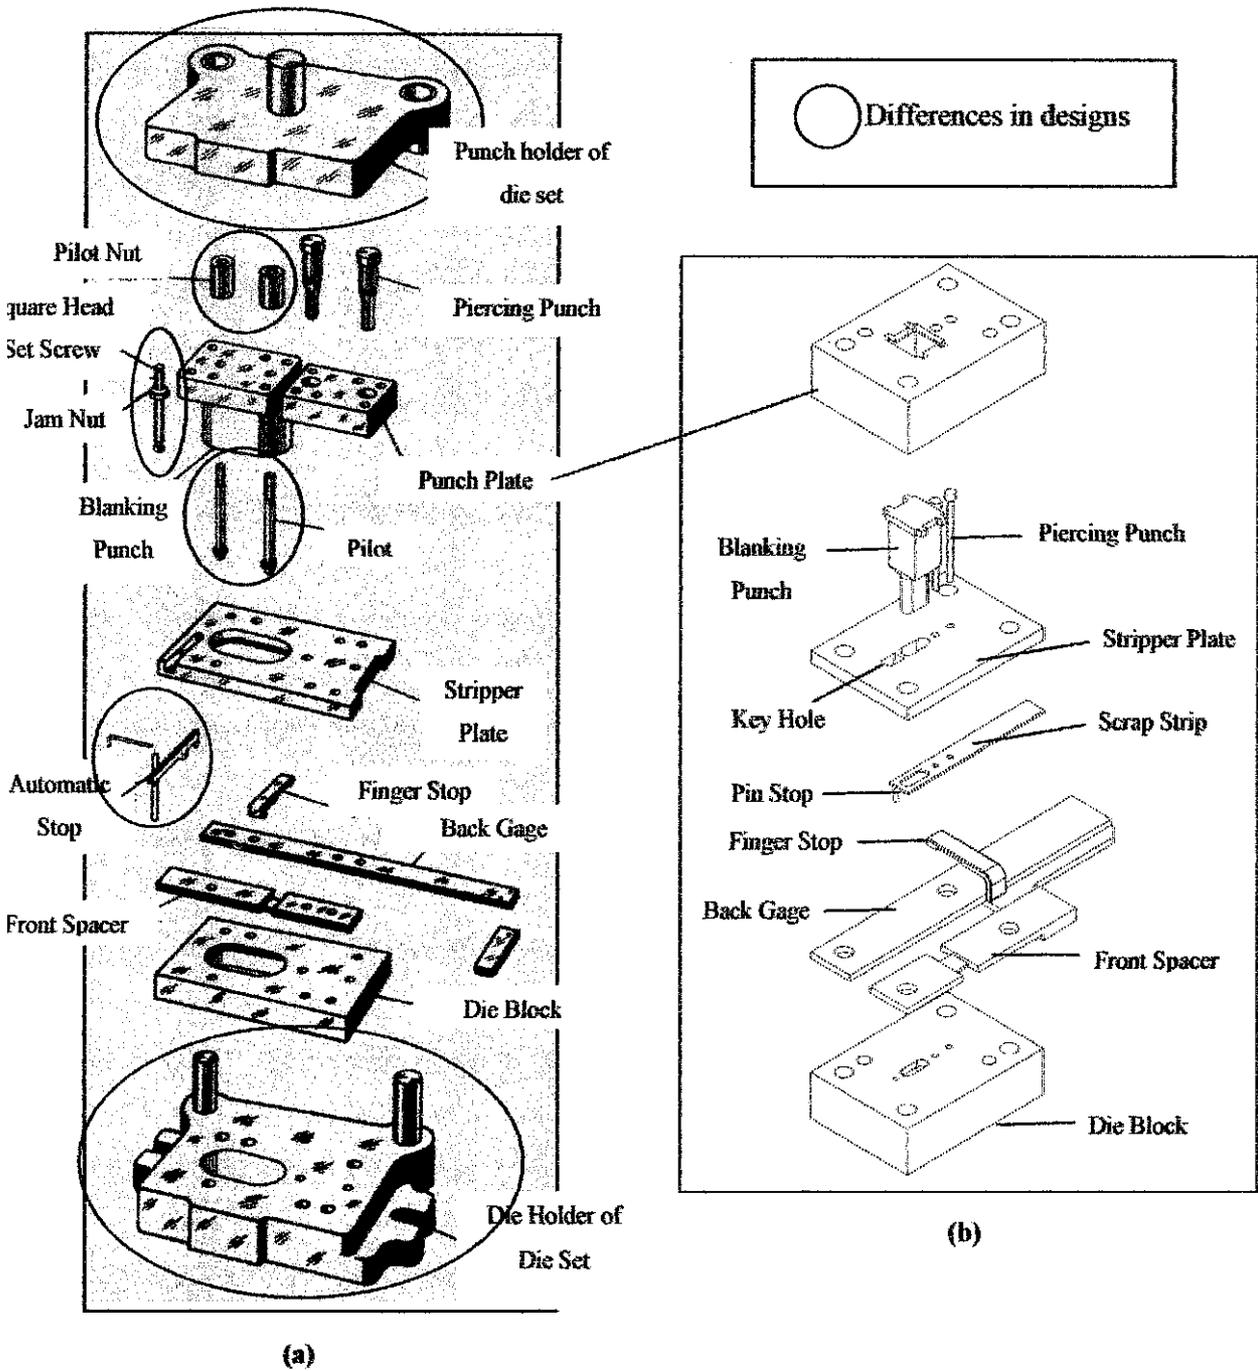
Exploded View of Die Components (a) Extracted from Reference Book [1]
